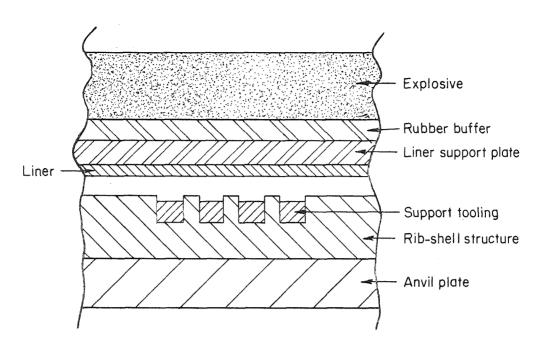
COMPONENT ARRANGEMENT FOR RIB-TO-LINER WELDING OPERATION
